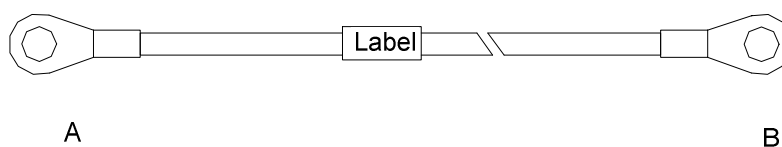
CHASSIS PE CABLE INSTALLATION SCHEMATIC DIAGRAM
